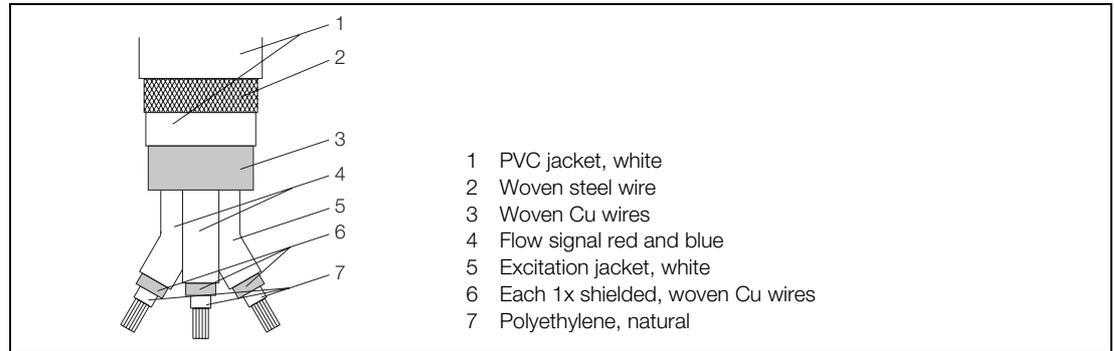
Signal Cable Construction ABB No. D173D018U02
